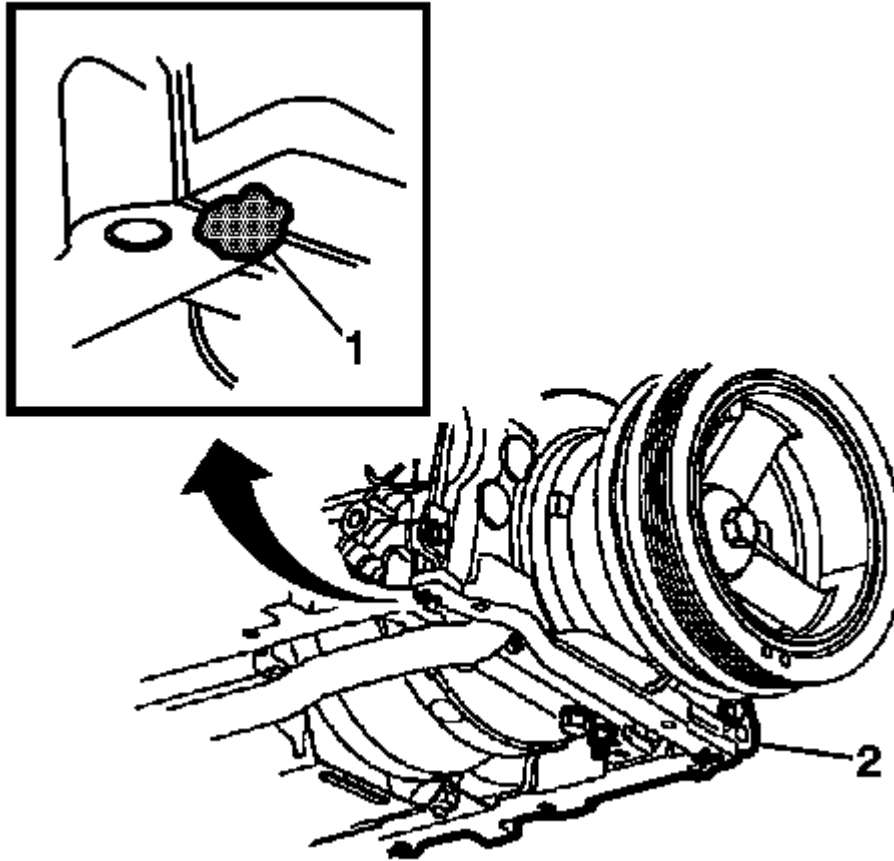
View Of Sealant Applied To Front Oil Pan-To-Engine Block Junction
